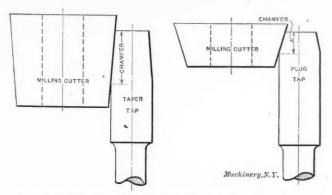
Principle employed in Tap Chamfering and Relieving Machines.
